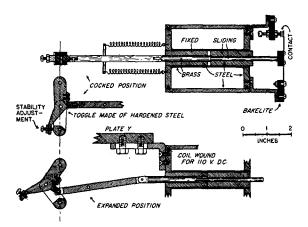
Detail drawing of the toggle joint and the electromagnet for tripping the toggle.
